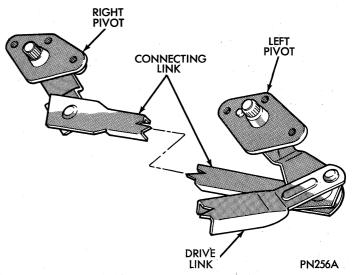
Windshield Wiper Linkage R, W, X, and S Models
